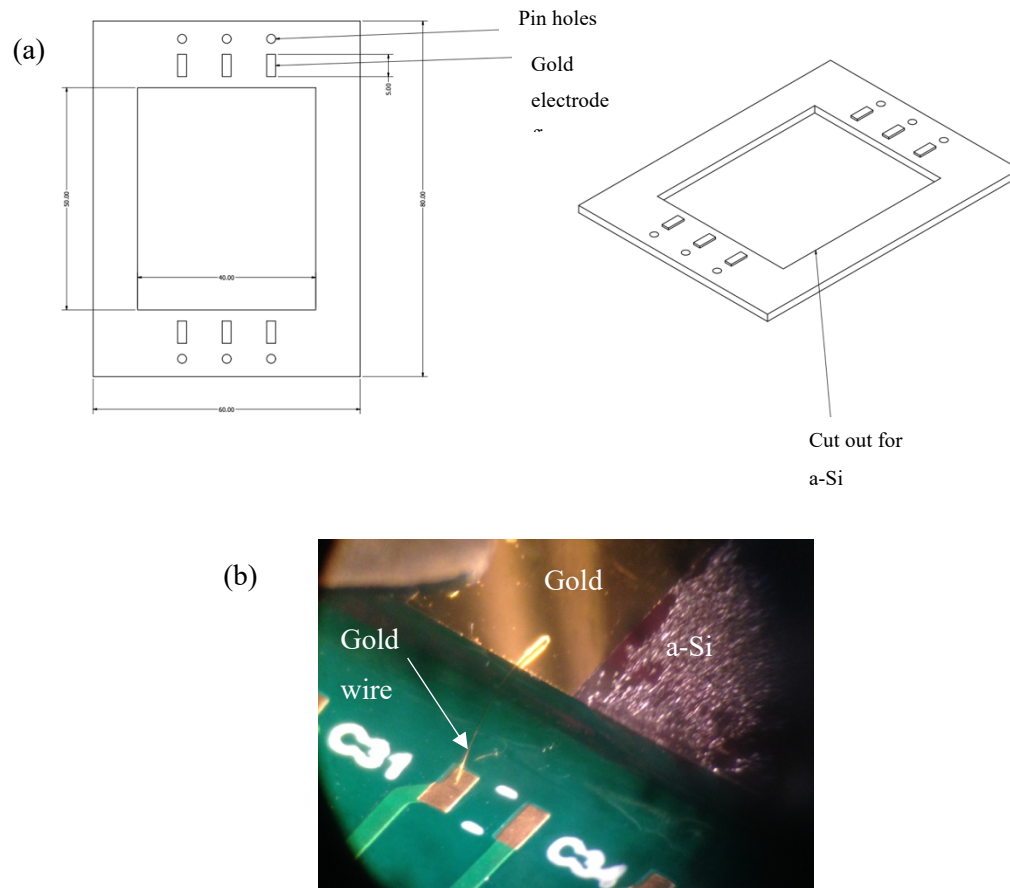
(a) Schematic of the a-Si mount (b) Microscope image of the arc bonded gold wire from the external PCB mount to the gold electrodes of the a-Si sample.
